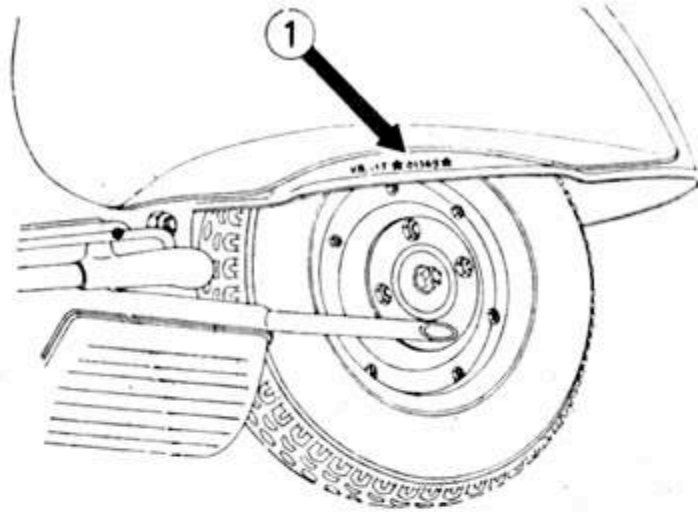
& 3: - Stamping on frame (1) – Stamping on engine (2)
